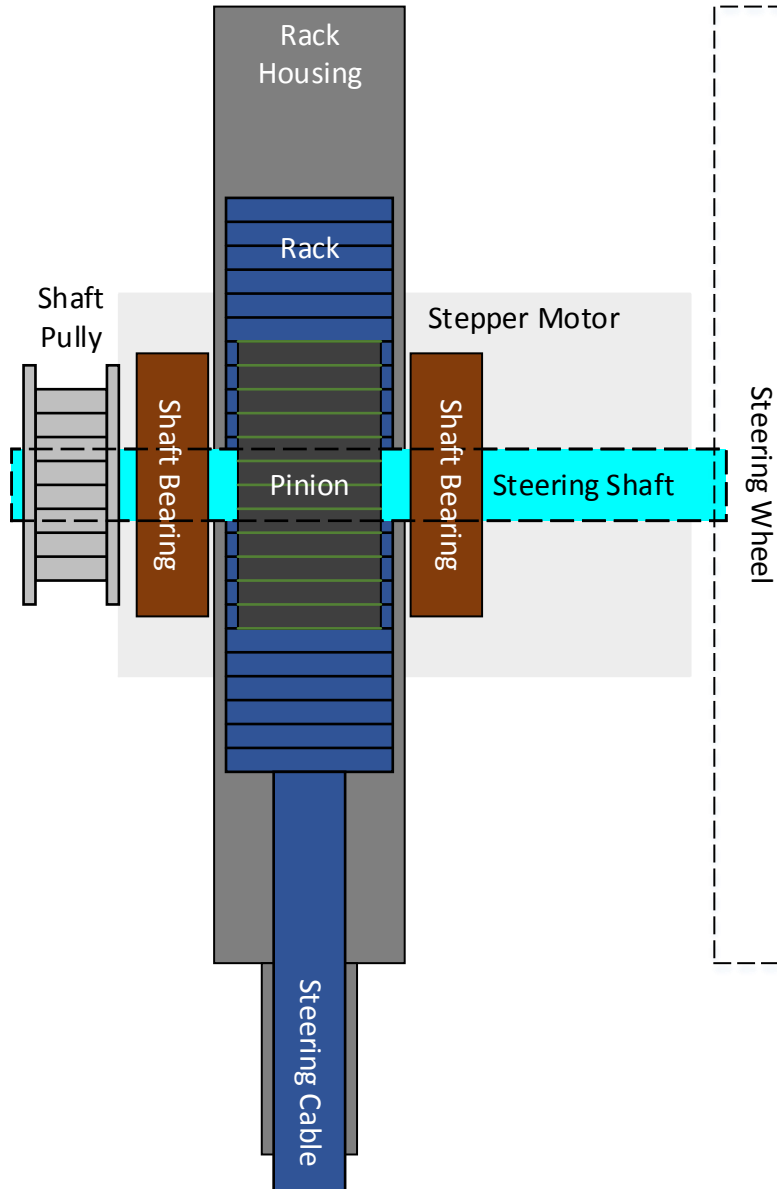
Stepper Motor Mechanical Connection Top View.
